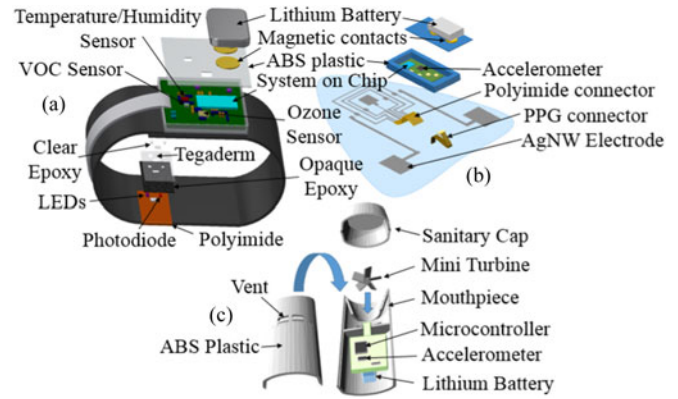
Exploded view of the wristband device, chest patch, and spirometer including the layers of the optical probe.
